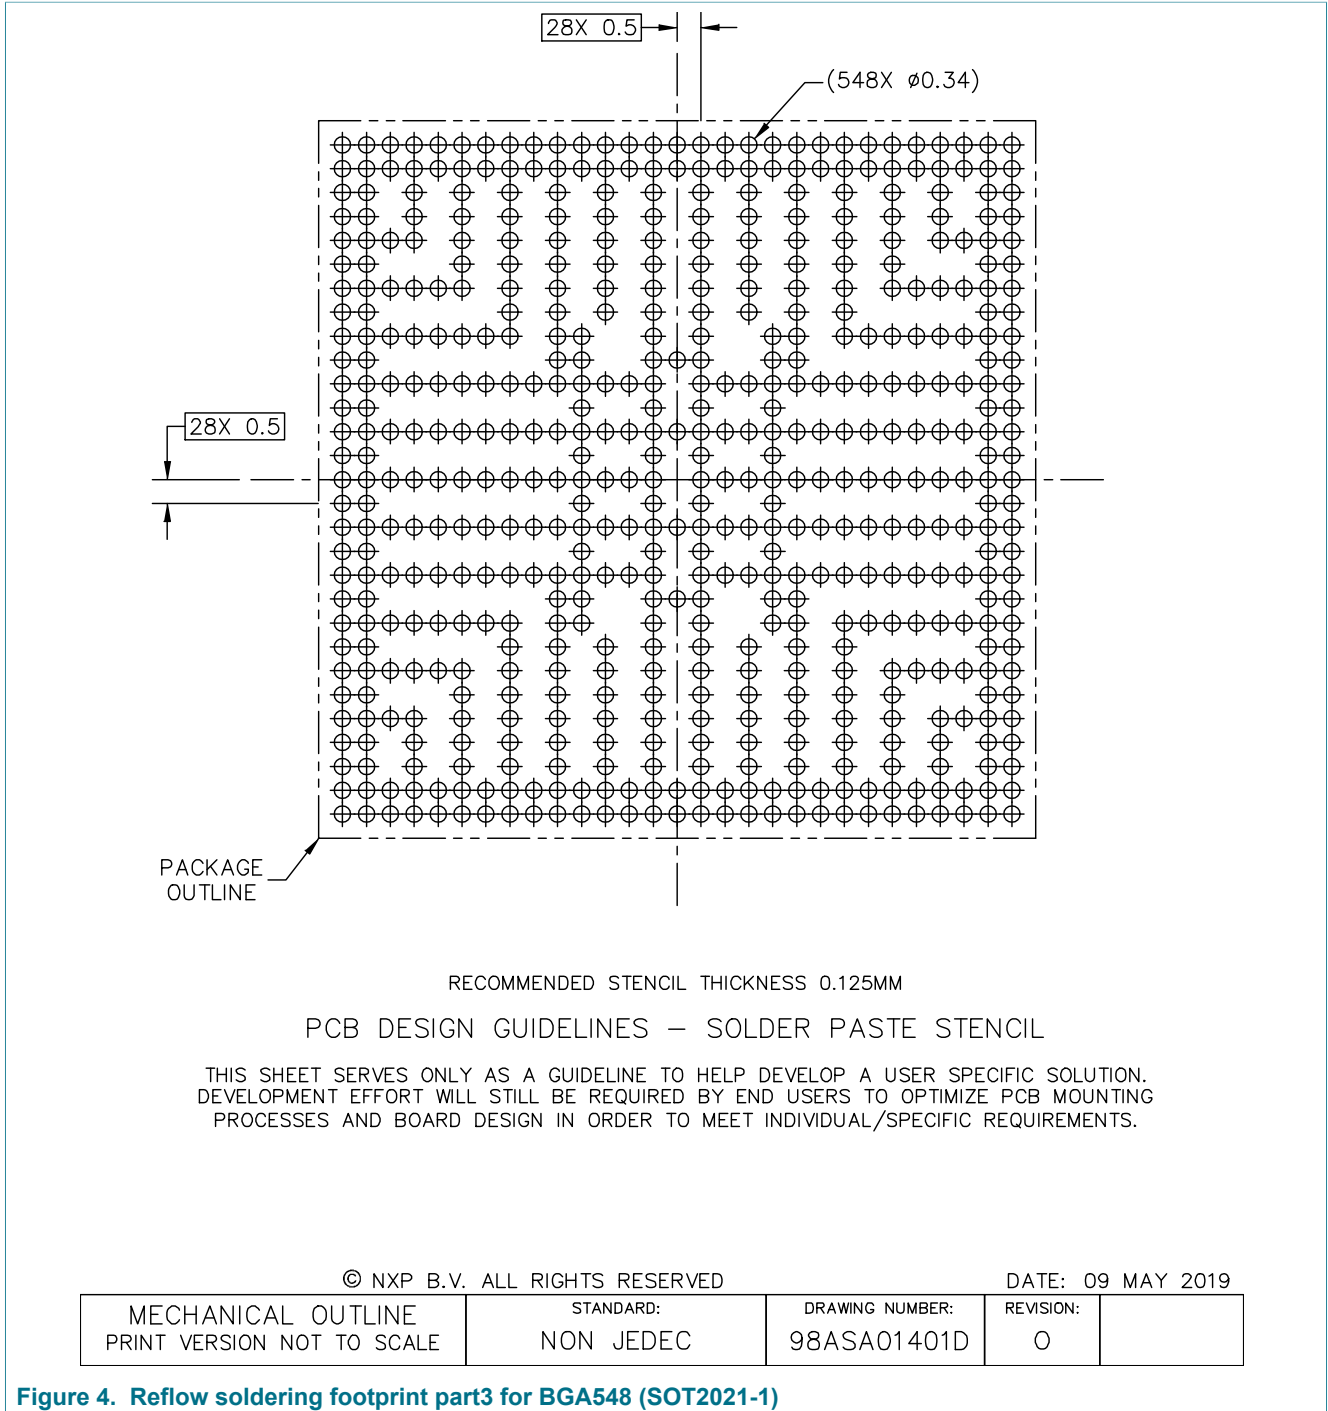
Reflow soldering footprint part3 for BGA548 (SOT2021-1)
